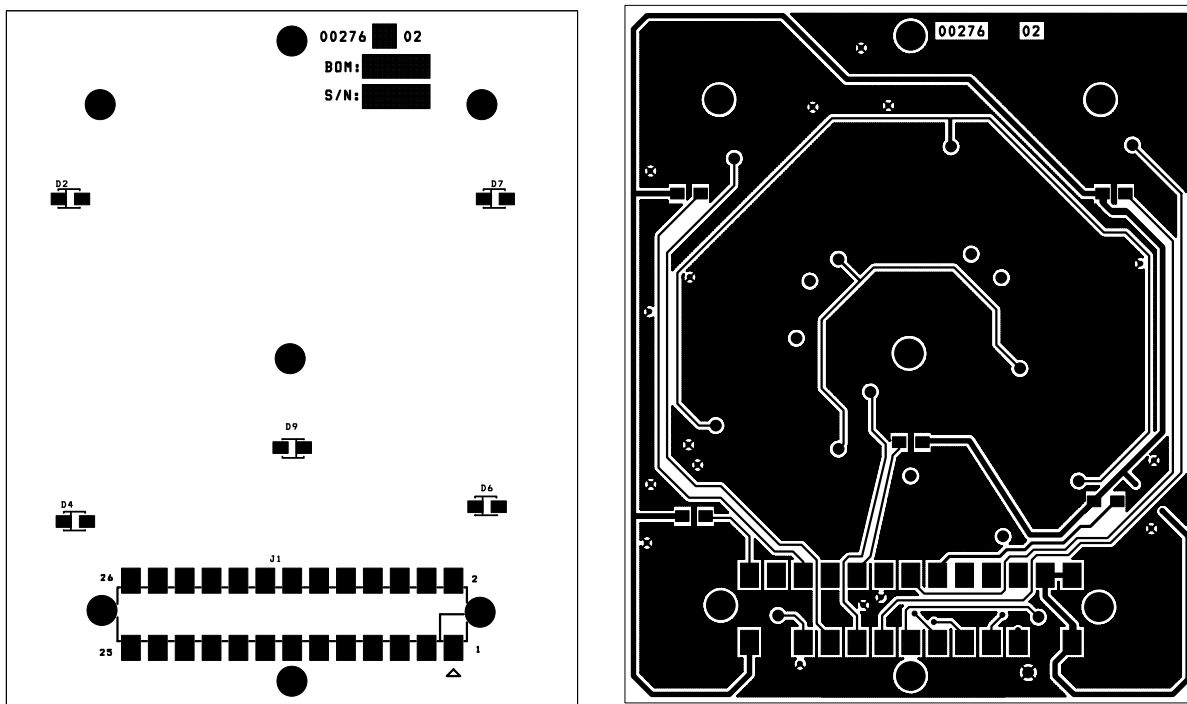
Rotary Touch Panel, Parts Placement and PCB Layout, Bottom Side
